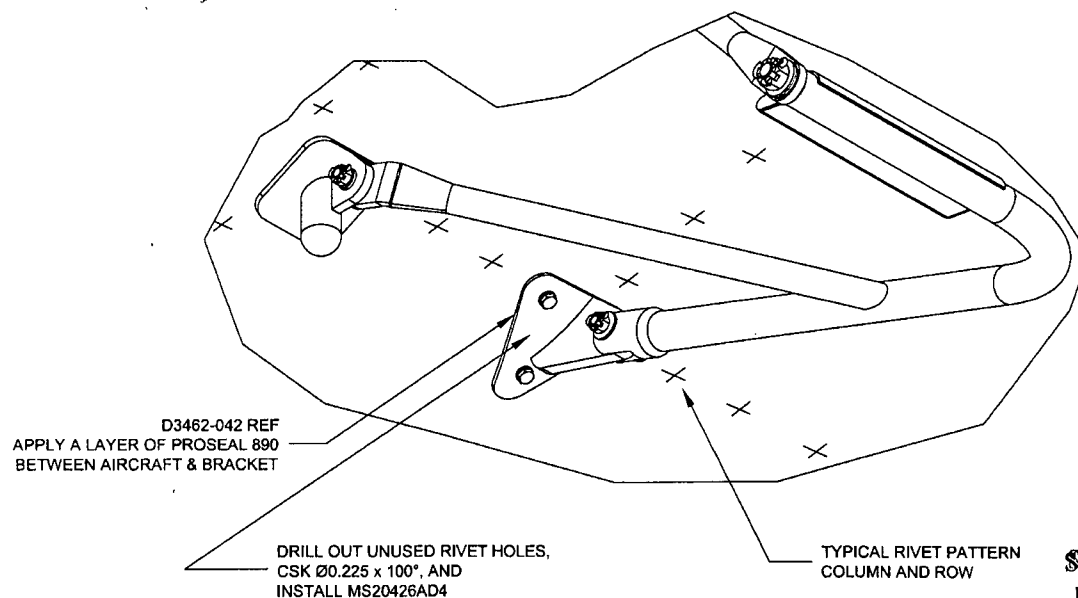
Detail View D3462-042 Bracket Assembly (-032 Installation, Shown) D3462-041, (-031 Installation Opposite)
